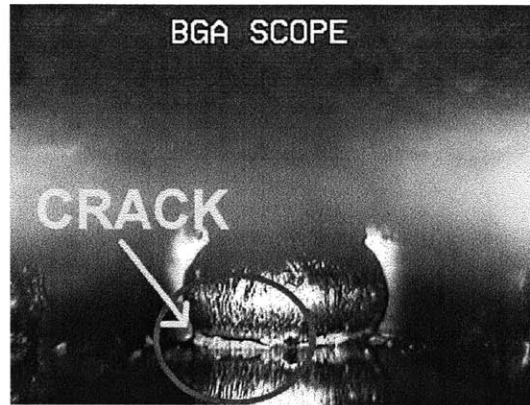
BGA solder joints fracture caused by thermal and/or mechanical stress [40]
